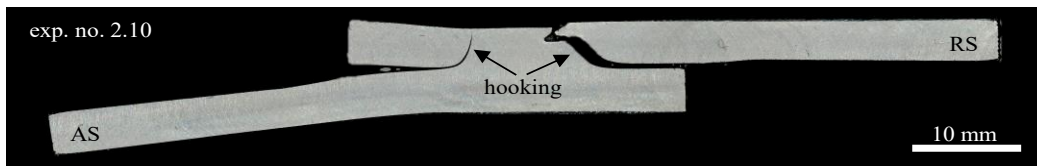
Fracture pattern of one shear test sample of exp. no. 2.10 (without cavities)
